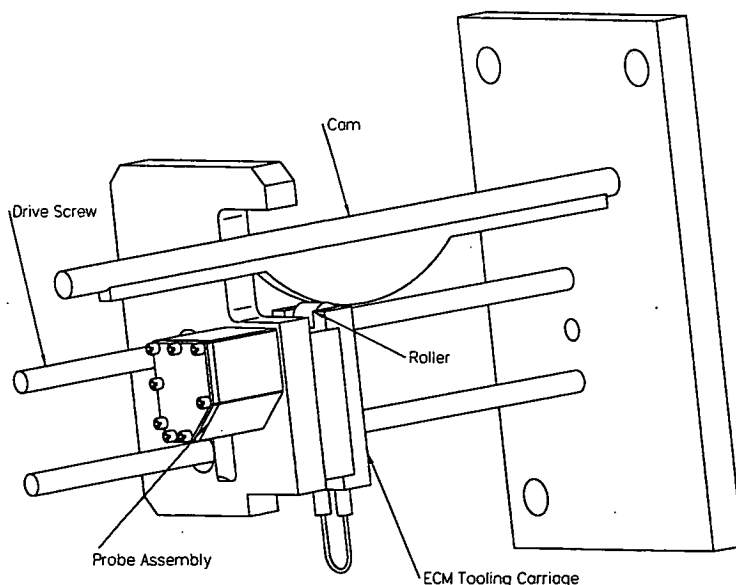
Schematic overview of ECM tooling and ACFM probe mounted on carriage/scanning assembly.
